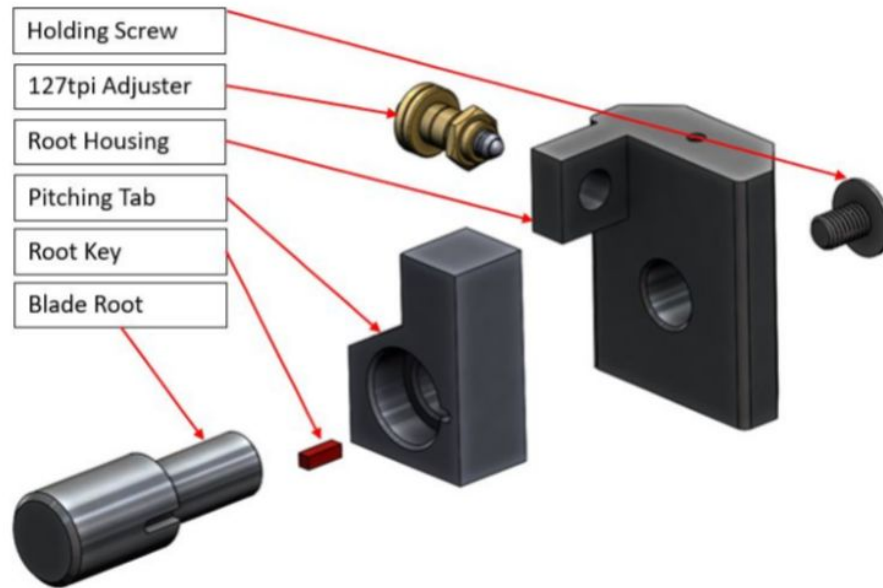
Pitch control assembly for the laser alignment jig [3].
